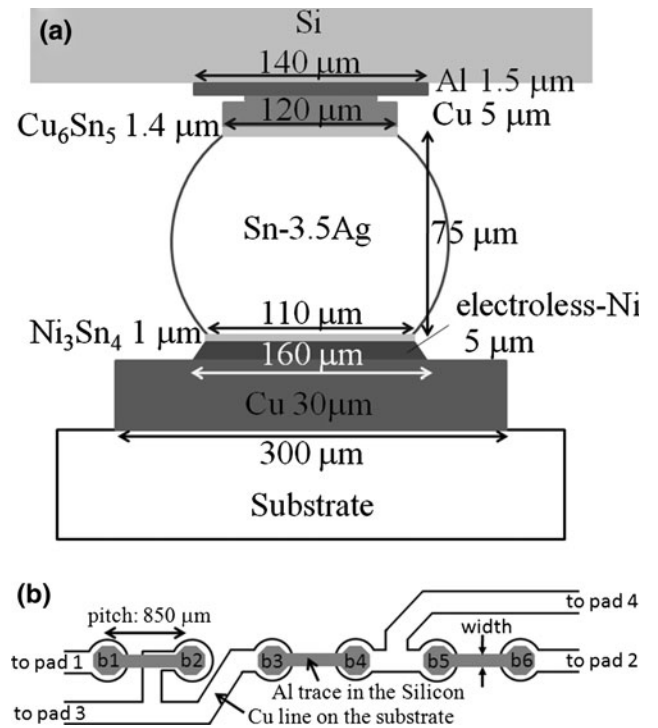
(a) Schematic of the flip-chip solder joints adopted in this study. (b) Plan-view schematic showing the daisy-chain layout of the joints.
